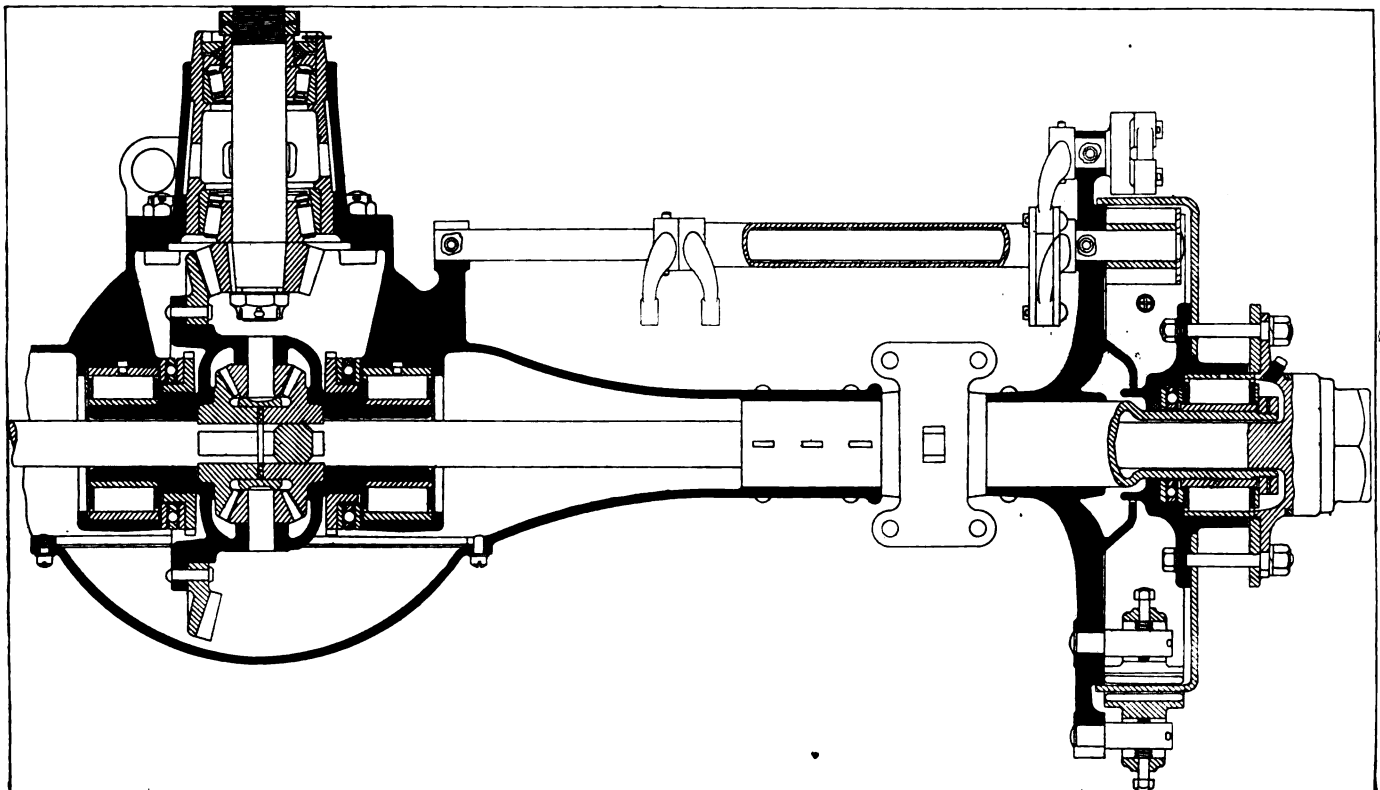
Horizontal section through the rear axle. Note special Moon mounting of brake rod and ball and roller bearings in differential
